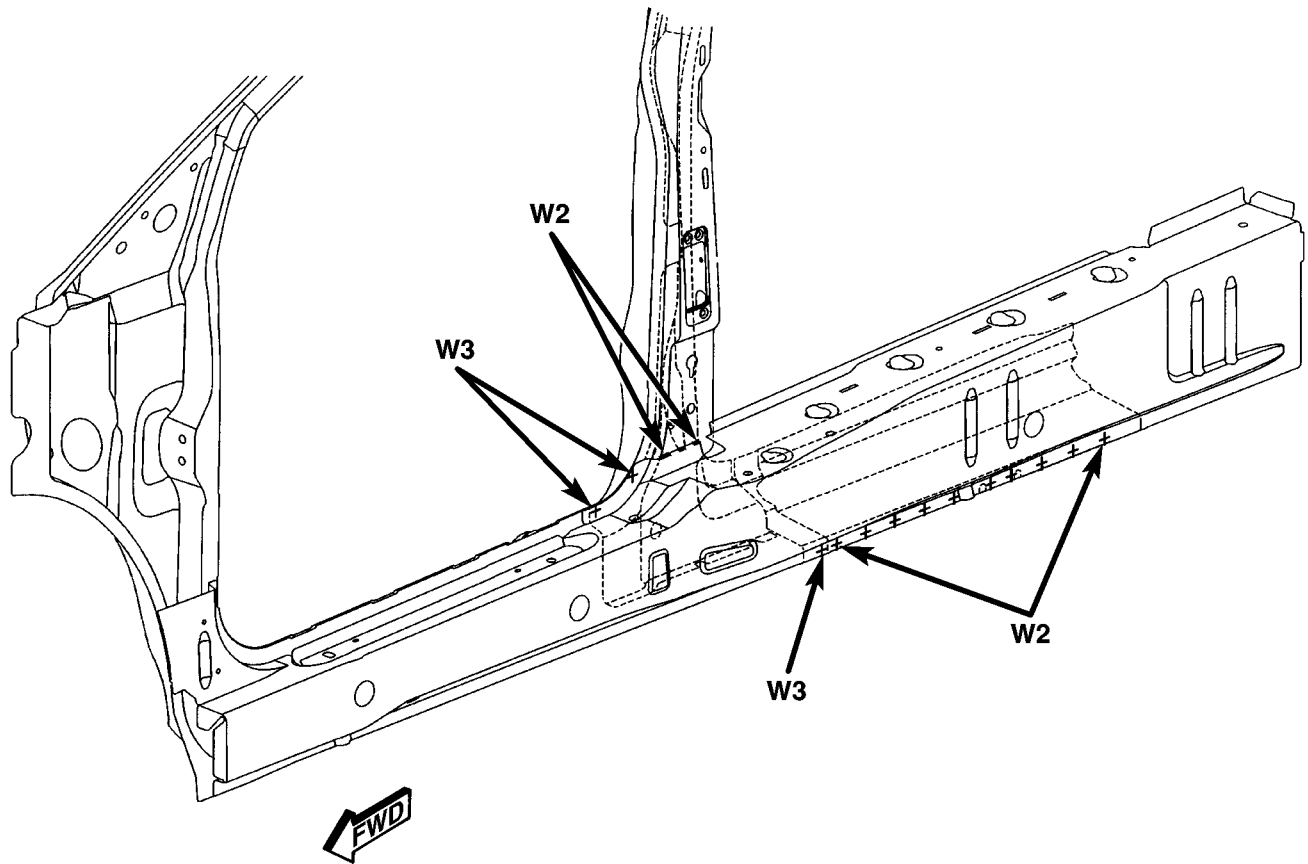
INNER SIDE SILL - LONG WHEEL BASE ONLY
